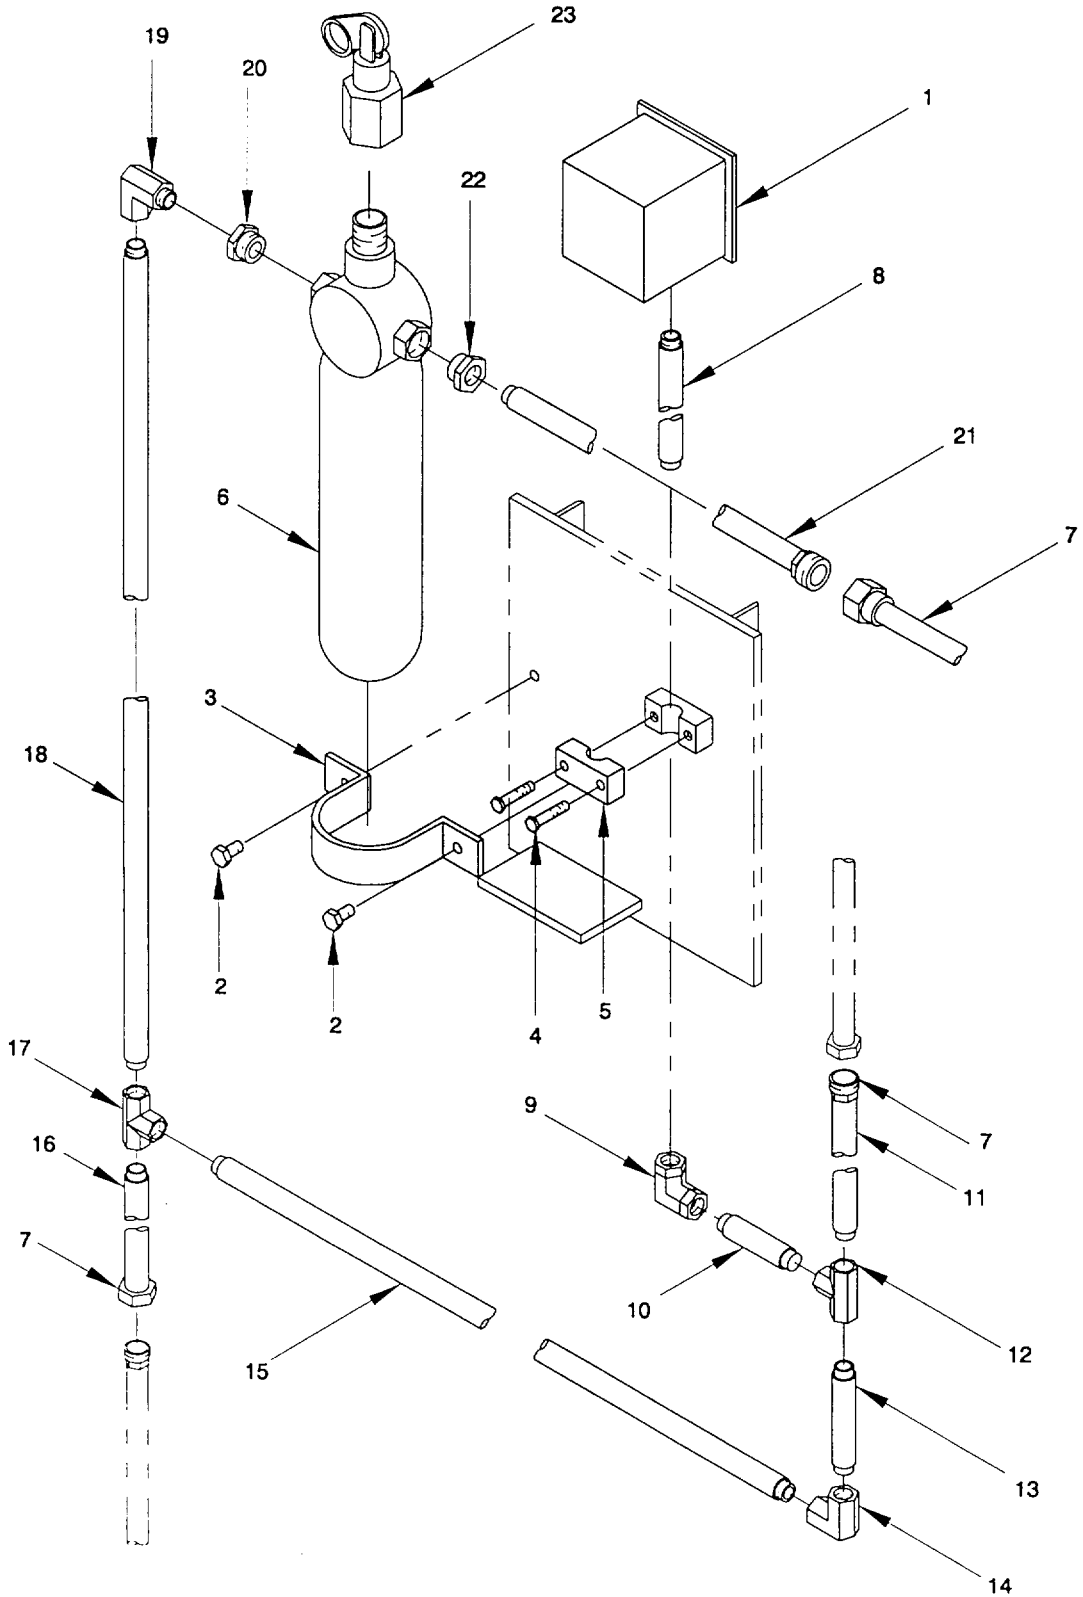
Time Delay Cylinder, Control Head & Pressure Switch, Fire Supp. System, Remove/Install
